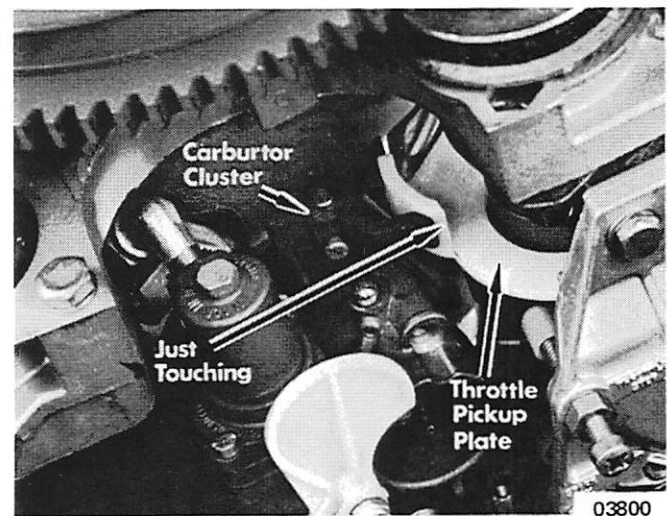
Throttle Pickup Tab Adjustment (Merc 1000SS)
